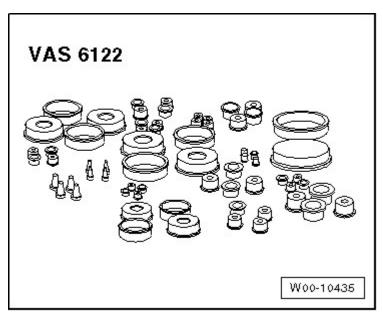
Identifying Special Tools - Drive Chain For Oil Pump And Balance Shaft, Removing And Installing
